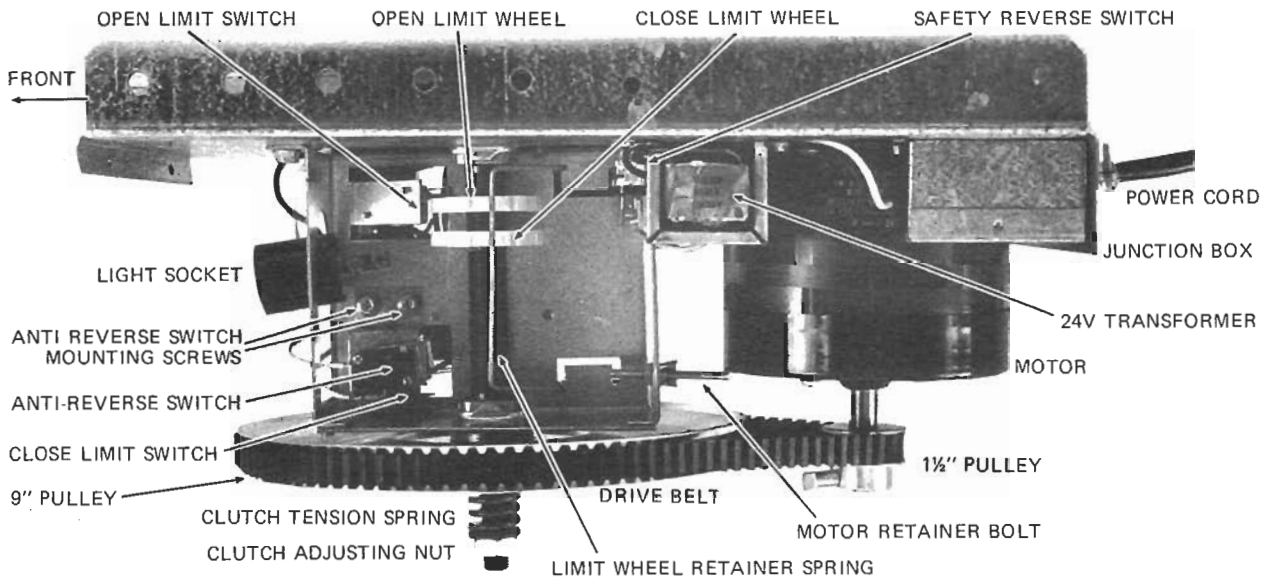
POWER UNIT-LEFT SIDE VIEW (COVER REMOVED)
